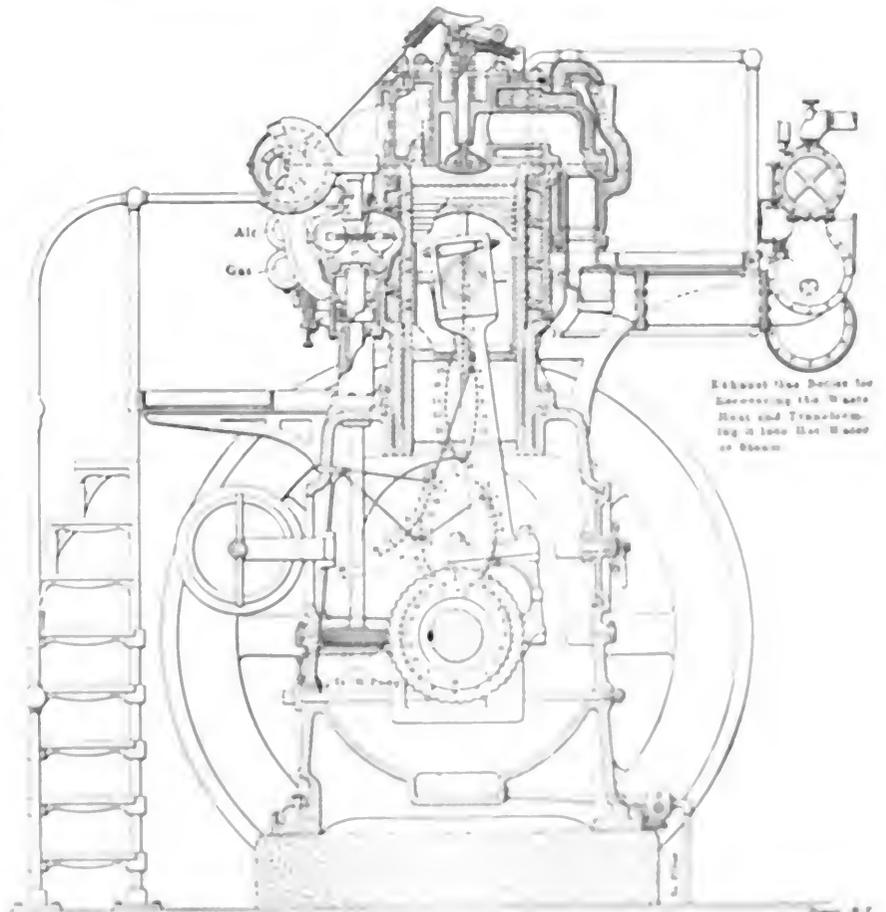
SECTIONAL VIEW OF TOWER GAS ENGINE.
